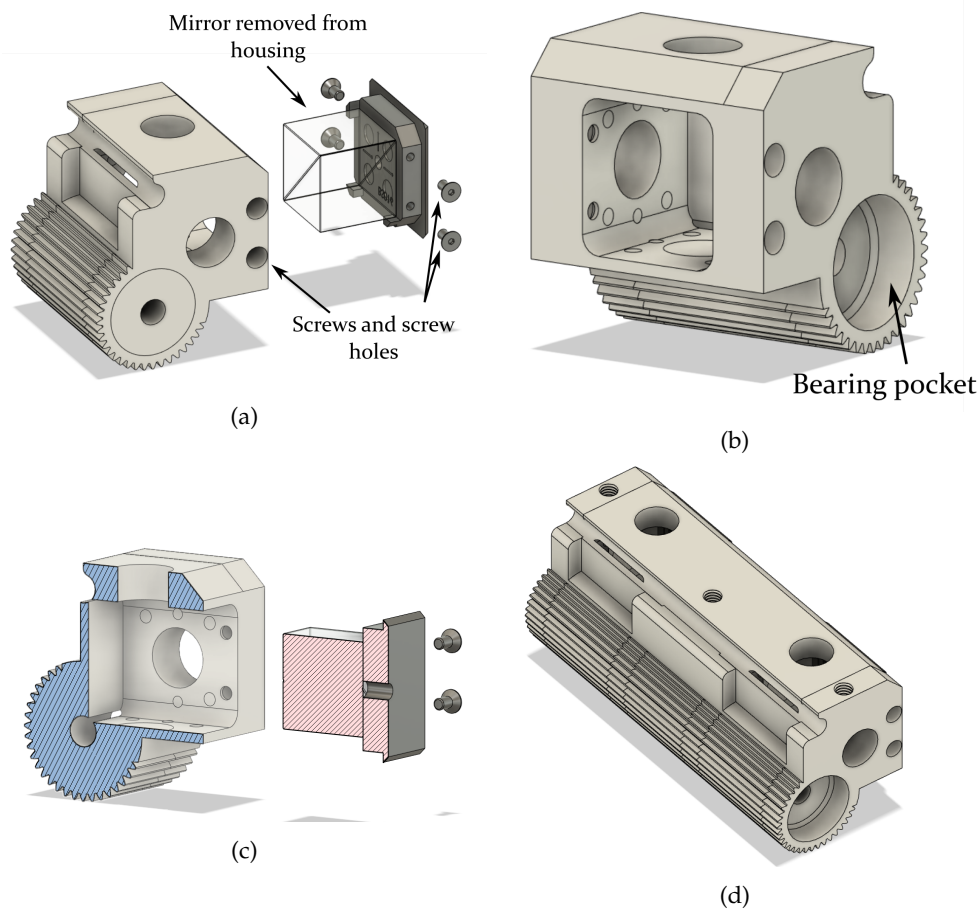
(a)/(b) Single-piece 50:50 mirror adapter design, for the mirror removed from its cube housing. (c) Cross section of (a) showing the internal shape of the adapter. (d) A large, two-mirror single-piece adapter. Note these designs will require printing on a resin-based 3D printer, or separation into two or more parts to mitigate overhang issues.
